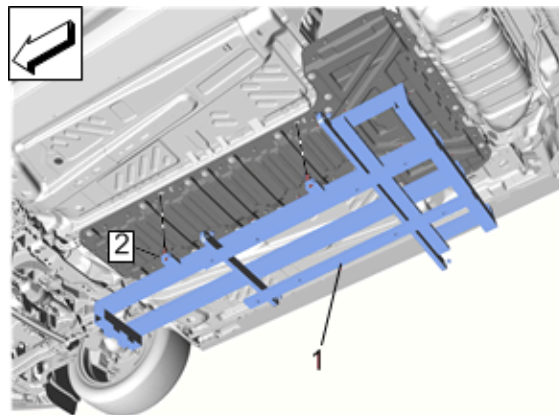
Drive Motor Battery Support Fixture And Locating Pins
